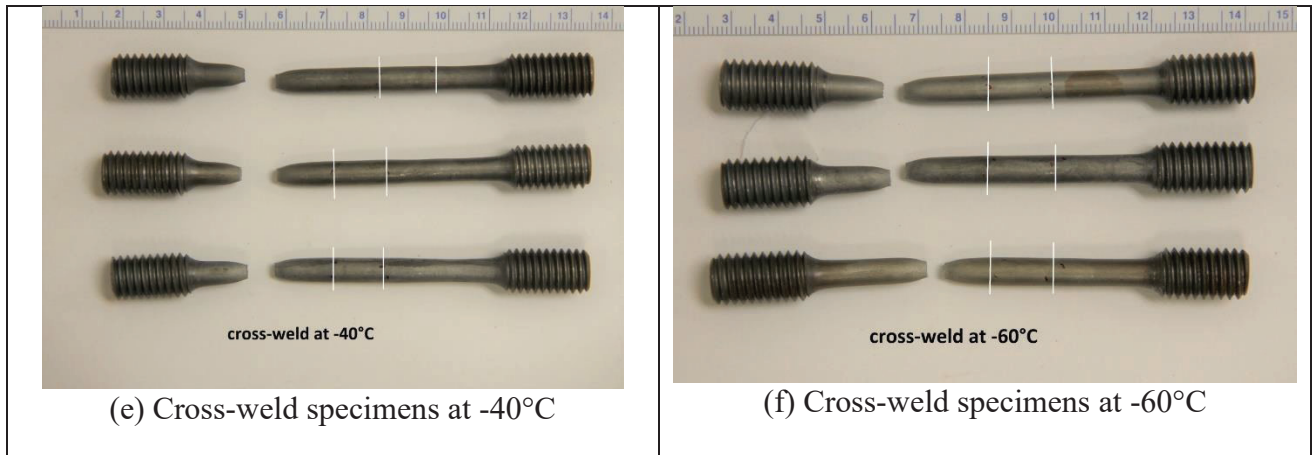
Photographs of cylindrical tensile specimens. White lines indicate the approximate weld region in cross-weld specimens.
